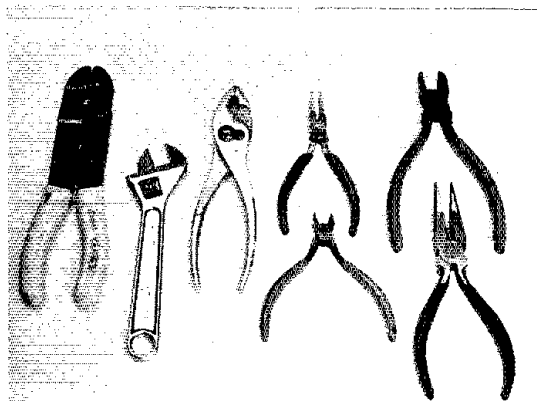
Shown here are (l-r) wire strippers, adjustable wrench, adjustable pliers, small set of diagonal cutters (dikes) and needle-nosed pliers, larger set of diagonal cutters and needle-nosed pliers.
